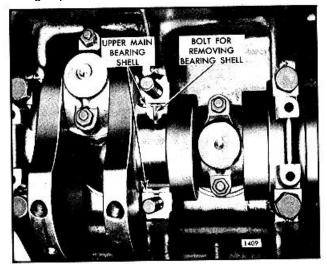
Removing Upper Main Bearing Shell (Except Rear Main)
